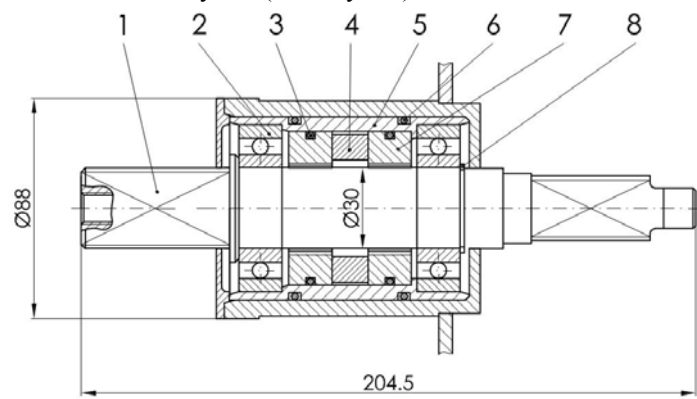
Sketch of magnetic fluid feedthrough for high power electric switches with SF_6 . Components: 1- shaft; 2- ball bearing; 3,6- “O” ring; 4- permanent magnet; 5- non-magnetic casing; 7- polar piece; 8- safety ring.
